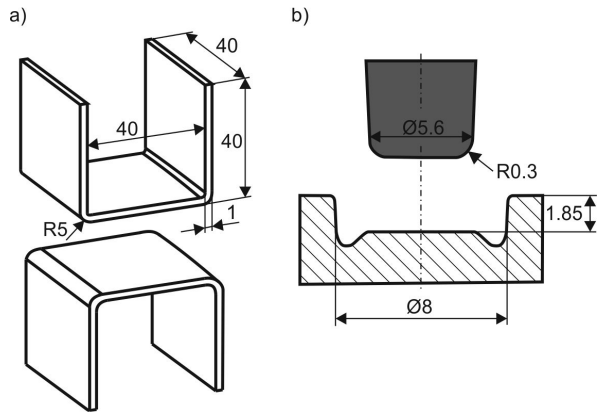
Samples geometry: a) sheet material dimension, b) forming tools dimensions
